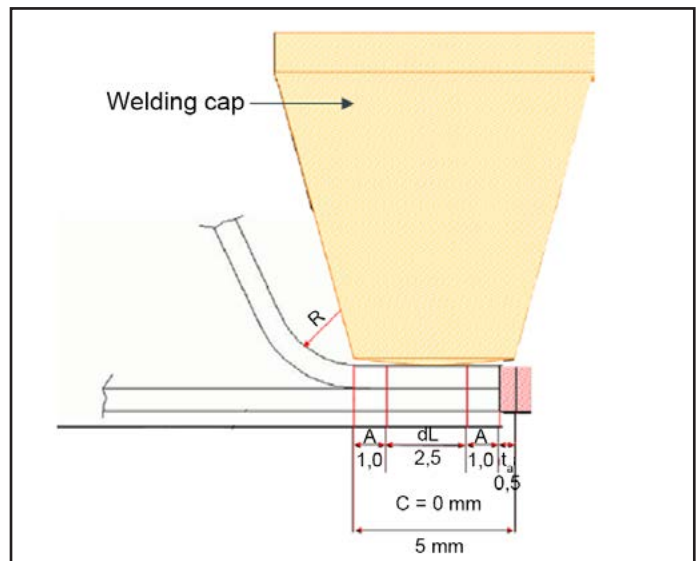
Schematic diagram of (alternative) spot welding of the window frame A – robot tolerance range assuming the invariable location of the projection, C – minimum distance between the projection and the edge of sheets $C = 0$, dL – weld nugget diameter, R – radius, t_a – dimensional tolerance of the sheet
